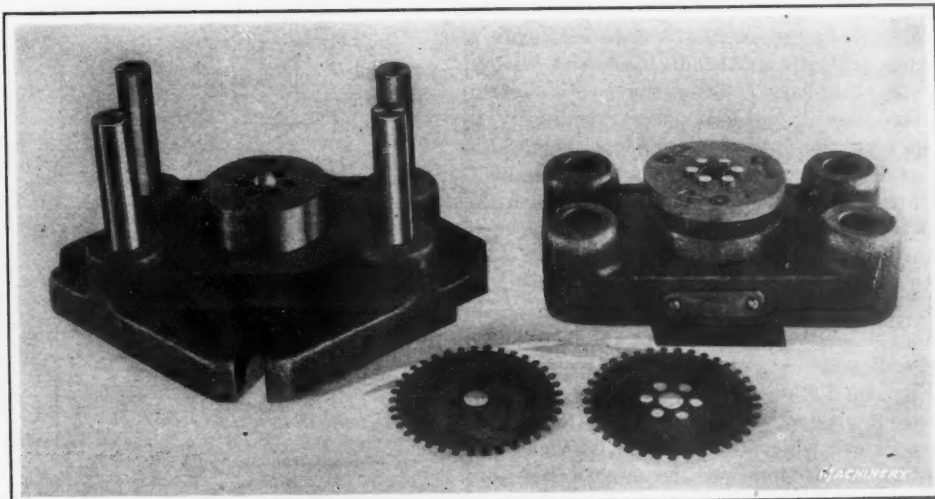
Sub-press Die used for punching Holes in Sewing Machine Motor Rotor Stampings
